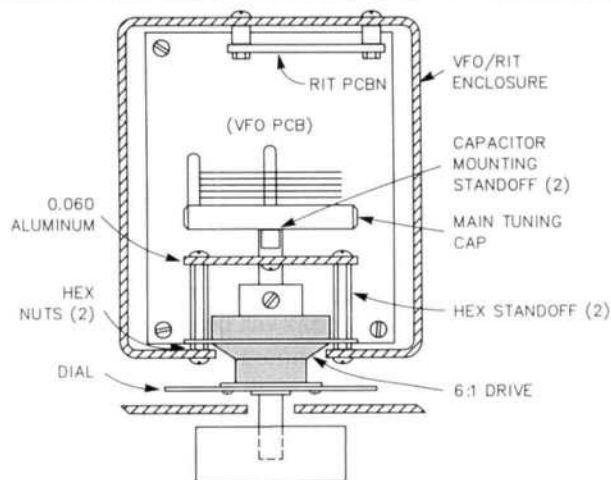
VFO/RIT enclosure detail, showing the mounting of the VFO and RIT boards and the 6:1 reduction drive. The enclosure is an unpainted LMB minibox, 2-3/4 by 2-1/8 by 1-5/8 inches (Mouser 537-TF-770). The reduction drive is a Jackson Brothers 4511/DAF (Radiokit).
